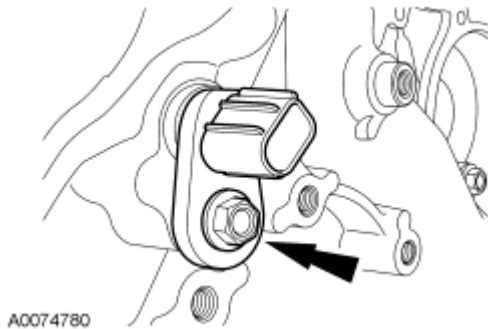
Locating Camshaft (CMP) Sensor Bolt
